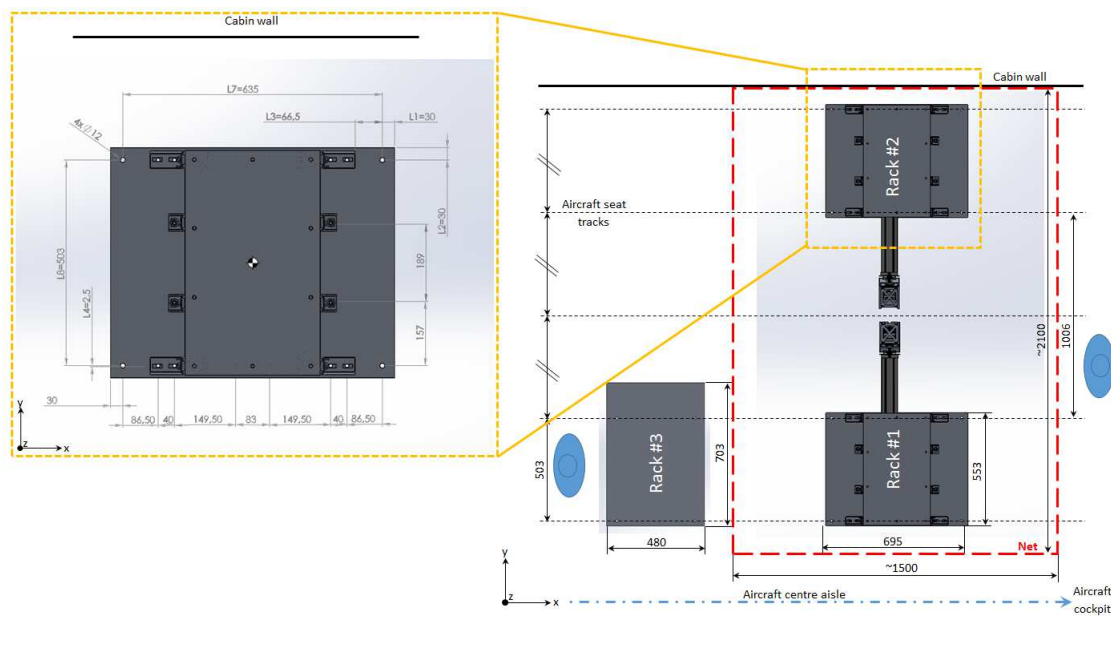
Top view of cabin layout with the main dimensions (right) and zoom of the baseplate with the distances of the fixing holes highlighted (left). All the measures are in [mm].
